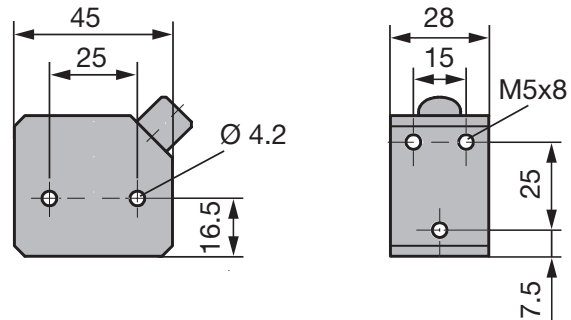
Installation dimensions of BTL5-P-4500-1 magnet
